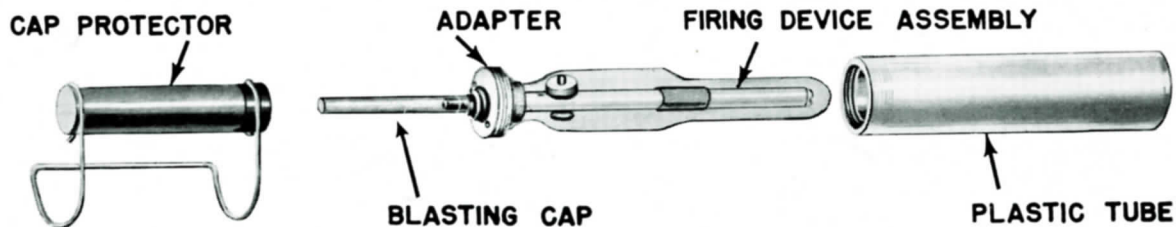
Exploded view of firing device assembly staked to the coupling base, cap protector, and plastic transportation tube.
